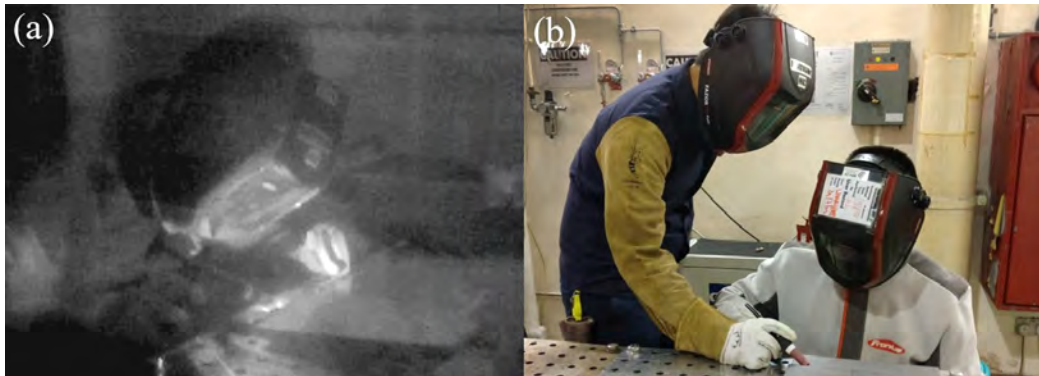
(a) Arc welding; (b) Illustration of traditional training approaches, where the trainer needs to demonstrate the welding skill one by one.
